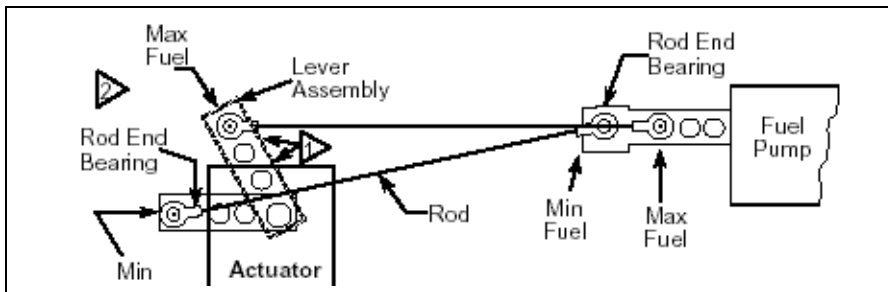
Rotary Actuator to Linear Fuel Pump Linkage
